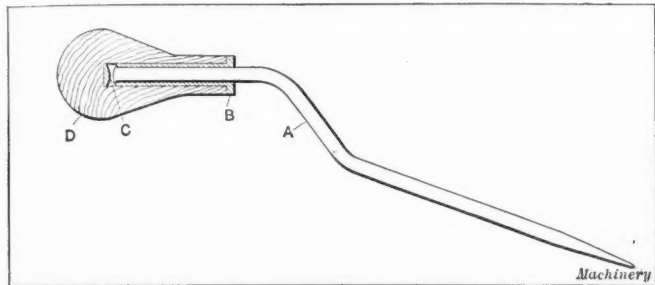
A Revolving-handle Screw Driver for Rapid Assembling of Work
